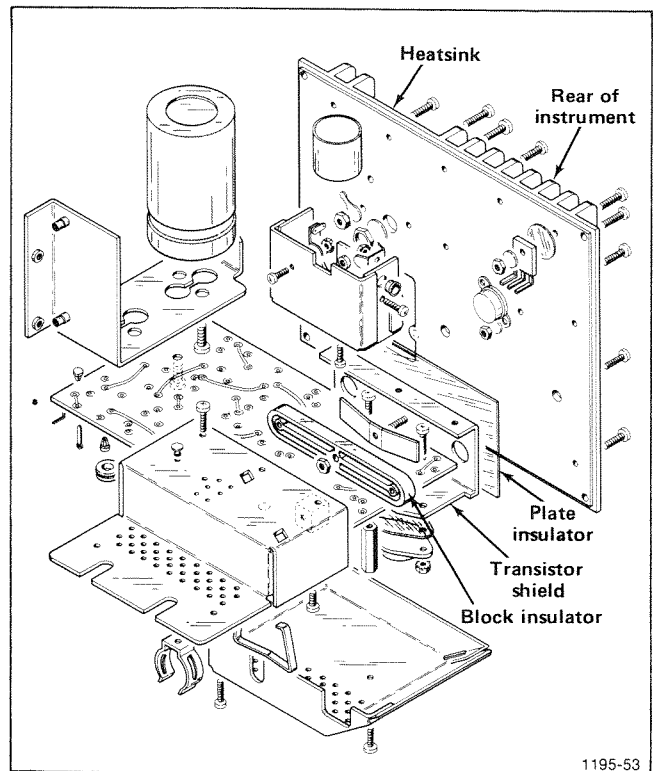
Exploded-view drawing of a portion of the power unit identifying several critical parts.
